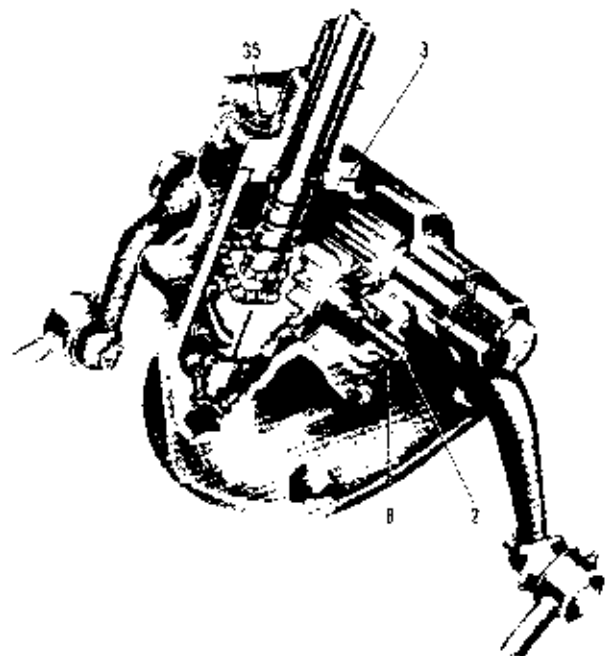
Removing threaded service type front axle pivot pin with home made nut. Nut is made by welding lugs on hex bar. Bar should fit inside diameter of pivot pin and lugs be shaped to engage notches in end of pin.
